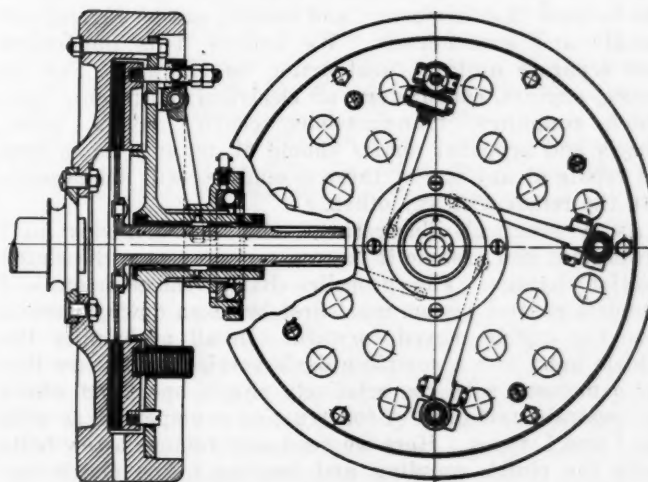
The single-plate clutch used in all Fifth Avenue Coach Co. chassis
